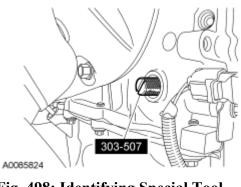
Identifying Special Tool Courtesy of FORD MOTOR CO.
